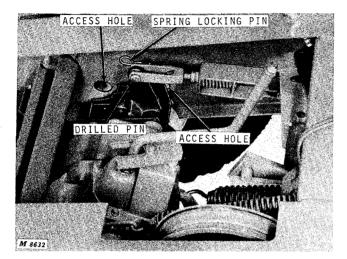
Removing Brake Assembly (Deck removed for clarity)
